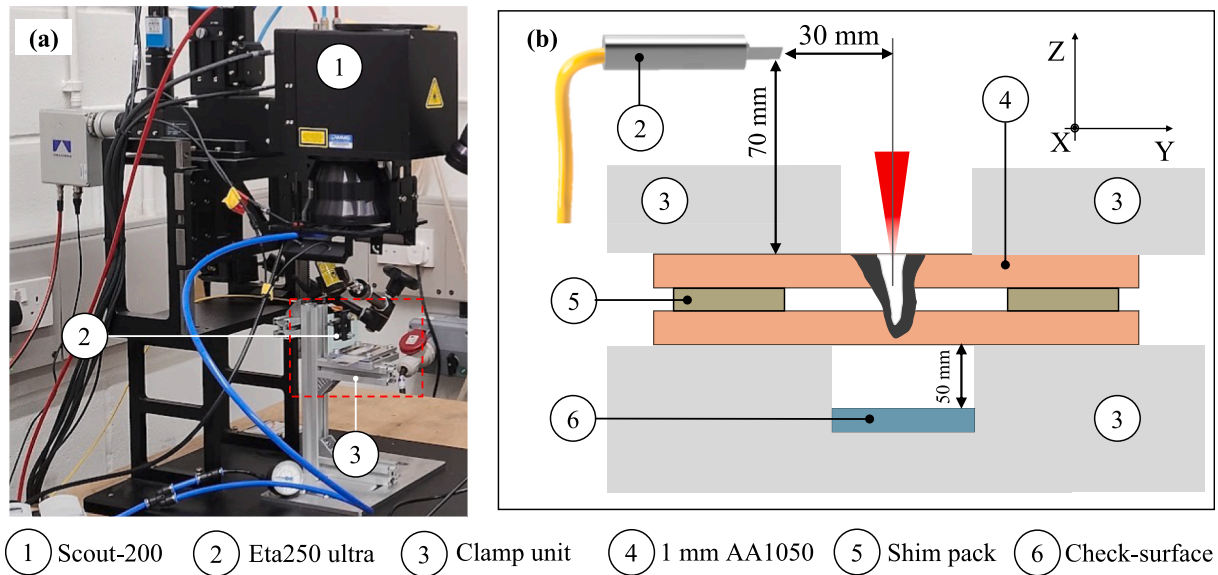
(a) Laser welding and sensor setup; (b) schematic view of the fixture setup and positioning of the optical microphone.
